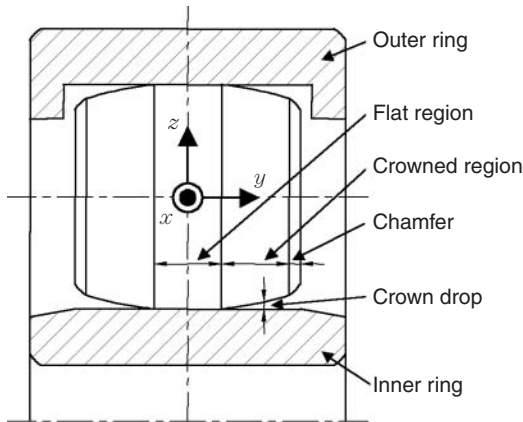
Schematic drawing of a crowned roller in a cylindrical roller bearing
